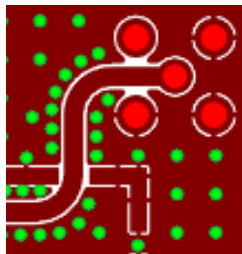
446x-TCExxBxxx RF Test Card PCB (Bottom Layer)
